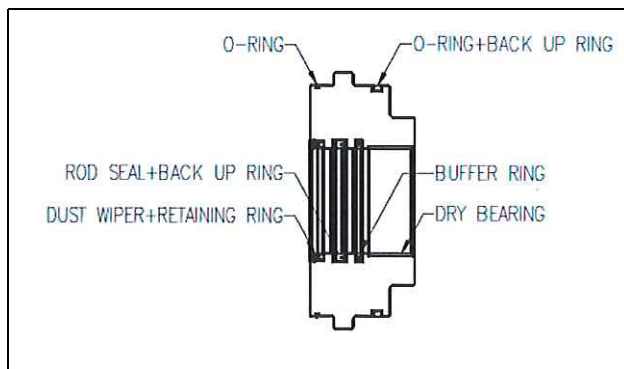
Head Seal Removal (Main Boom Lift Cylinder)
